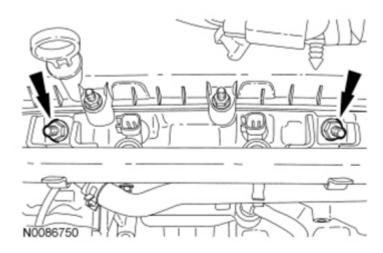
Locating Fuel Rail Stud Bolts Courtesy of FORD MOTOR CO.
